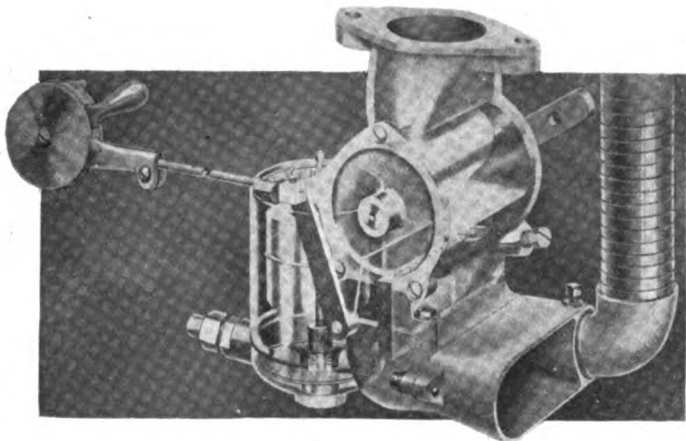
Phantom view of Master carbureter made by Master Carbureter Corp., Los Angeles, Cal
